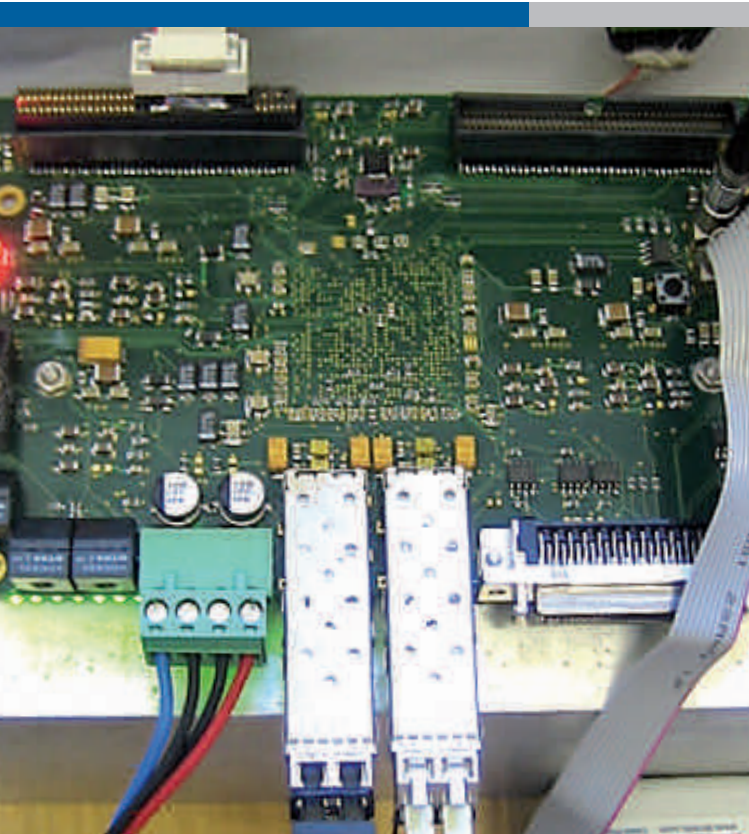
The front-end transceiver test board with two pluggable optical transceiver modules.
